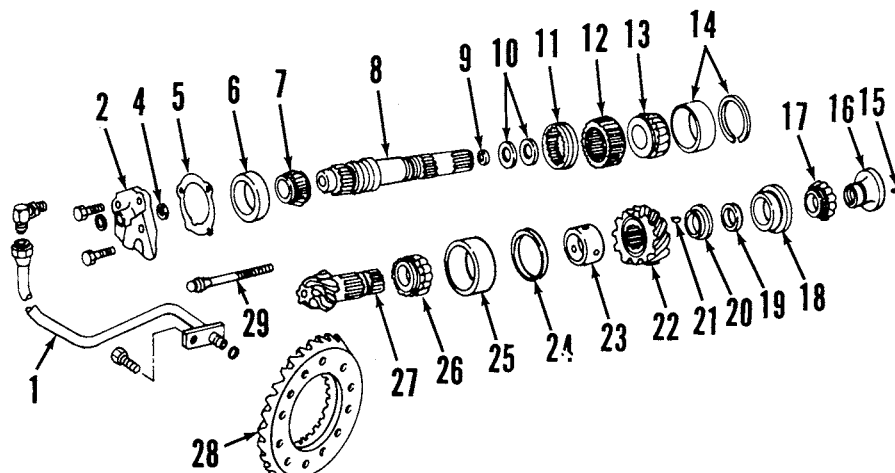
A—Exploded view of output gear reduction shaft and differential drive shaft used on 4650 and 4850 Power Shift models. Refer to Fig. 183 legend except for bearing cup and snap ring (14) and spacer (23).
